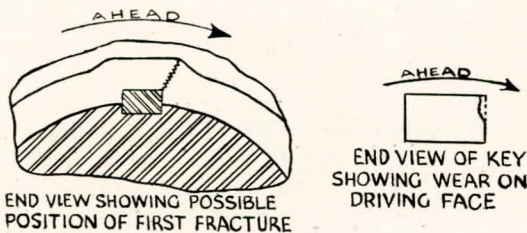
Showing location of fracture in way of the keyway.
